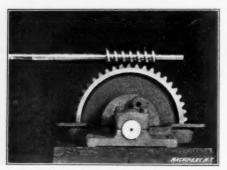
Photograph of Worm and Gear with Upper Part of Case Removed.
